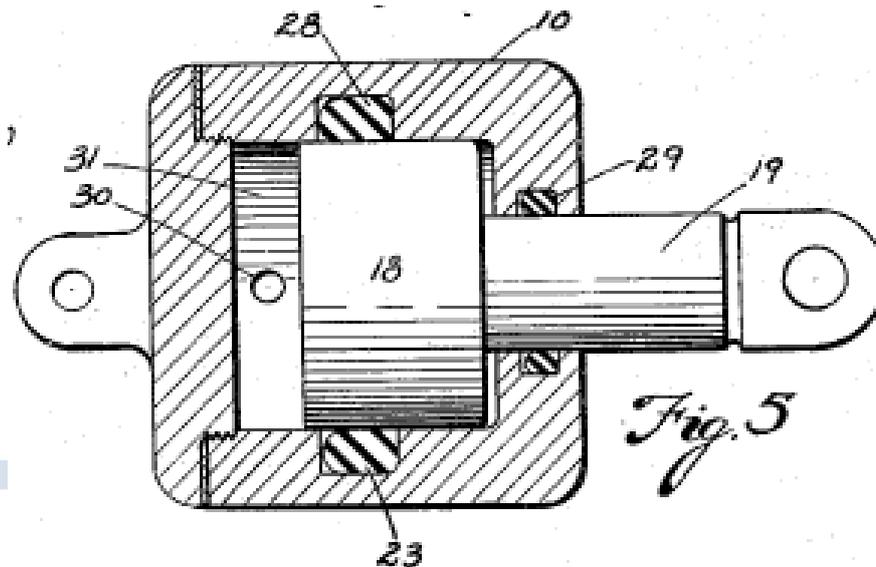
Extract from the most important O-ring US patent No. 2,180,795 dated November 21st, 1939: "Packing" by N. Christensen (In addition to variants of piston seals in this patent, a rod seal is also shown): The O-ring No. 28 seals the piston on the outside and is installed in the cylinder).²¹
